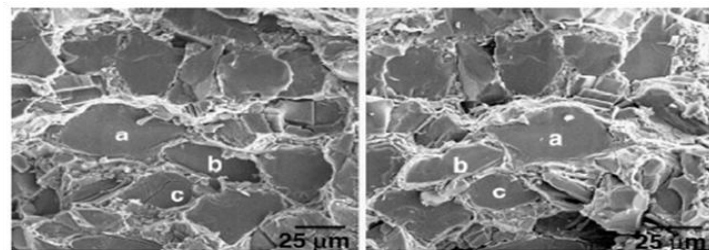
Tensile fracture surface of the sinter-forged consisting of brittle fracture of the SiC reinforcement and ductile fracture in the Al matrix. The letters correspond to matching particle fracture surfaces.
